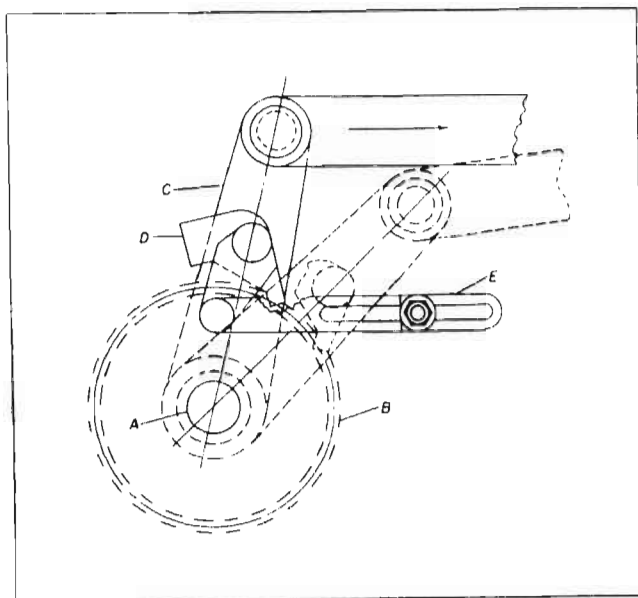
Mechanism showing ratchet engaged for slide-bar movement to right.
